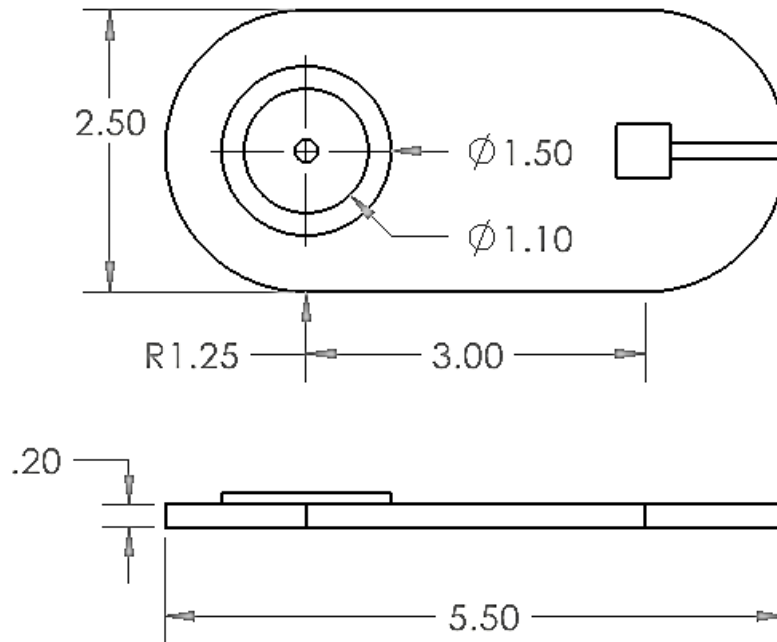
Cylinder cap with additional ridge for brace mounting and placement hole for the accelerometers.
